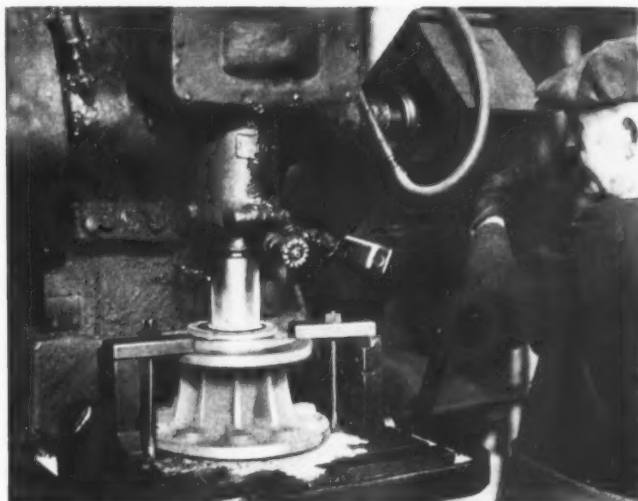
Using a Vertical Milling Machine Equipped with a Milling Cutter for Removing Gates on the Inside of a Large Truck Hub Casting
